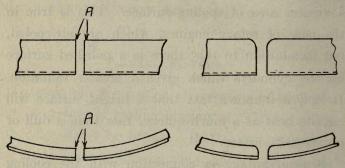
Illustration showing how an Obdurator Ring Joint should be made.
